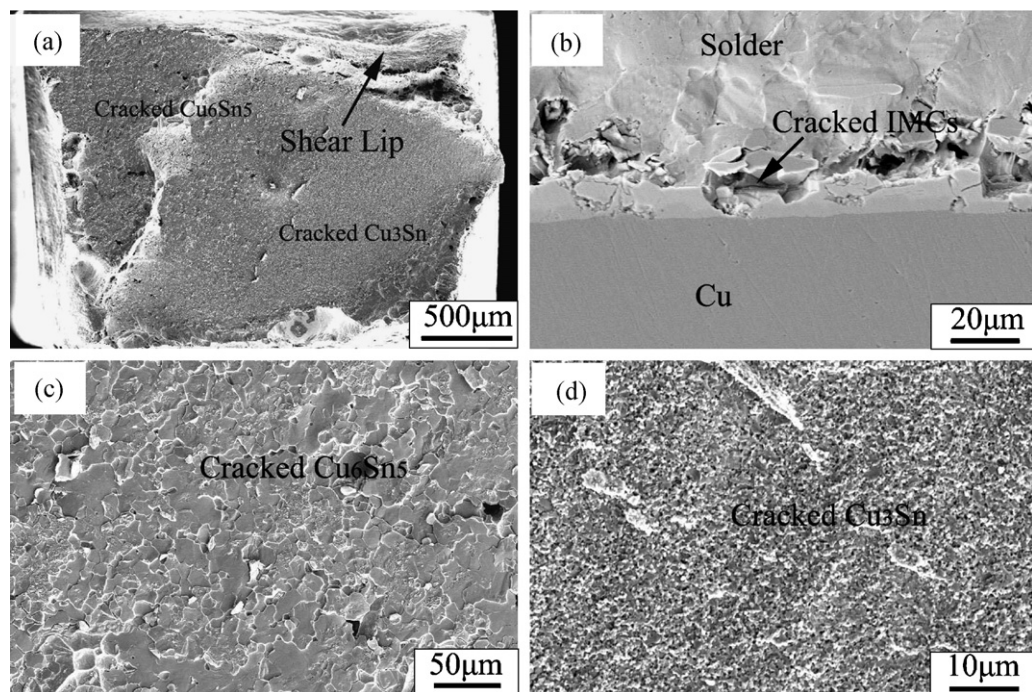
Fracture surfaces morphologies of solder joints aged for 225 h at the strain rate of $1.25 \times 10^{-4} \text{ s}^{-1}$: (a) macroscopic image of cross-section and (b) side surface; (c) and (d) microscopic fracture morphologies of the inter-granular brittle fracture region.
